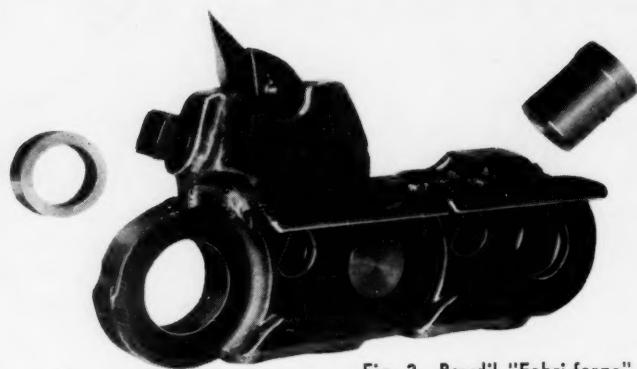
Bowdil "Fabri-forge" cutter chain.
